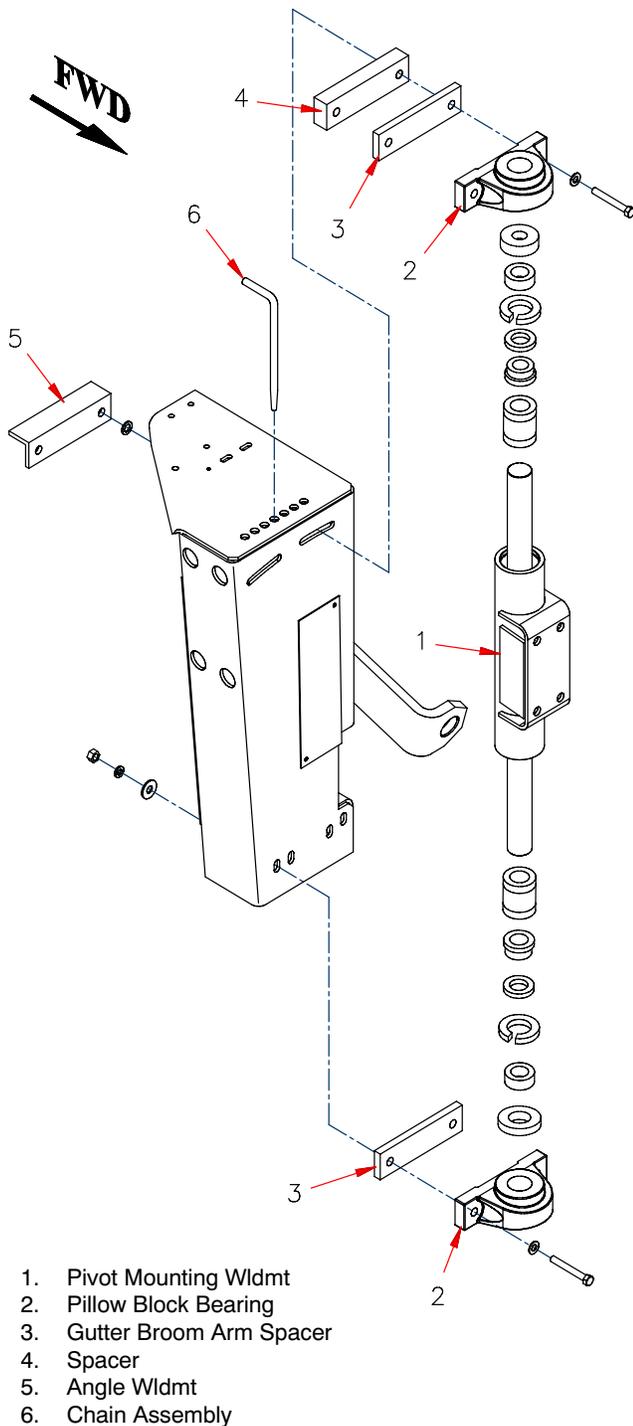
A Removal of the Gutter Broom Arm requires the use of a jack to hold up the assembly while spring tension is being released.
